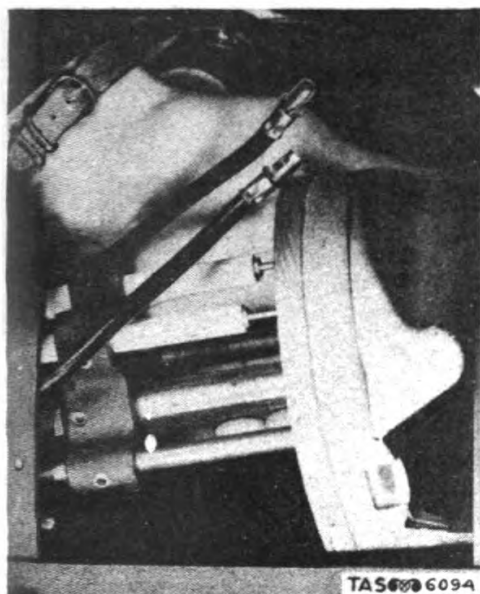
Removing Combustion Head Assembly from Air Tube.
